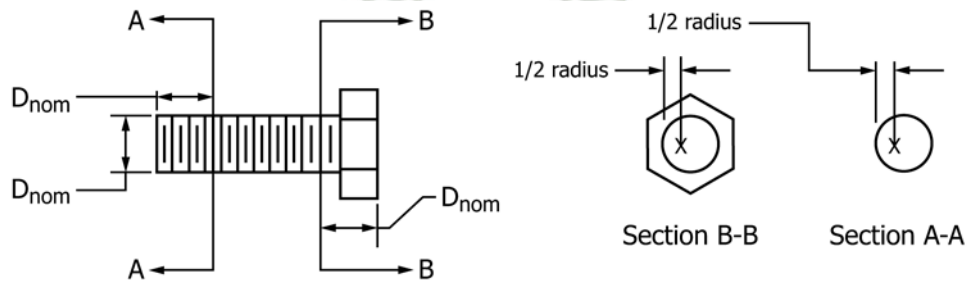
Location of Standard Round 2-in. Gauge Length Tension Test Specimen When Turned from Large Size Bolt
